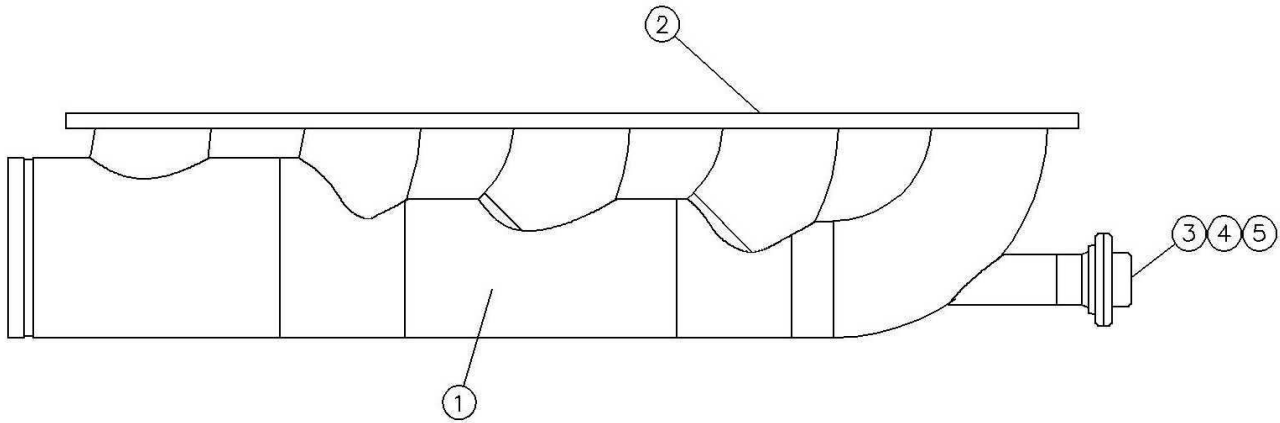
8" ZOOMIE SUCTION MANIFOLD ASSEMBLY WITH VICTAULIC END
